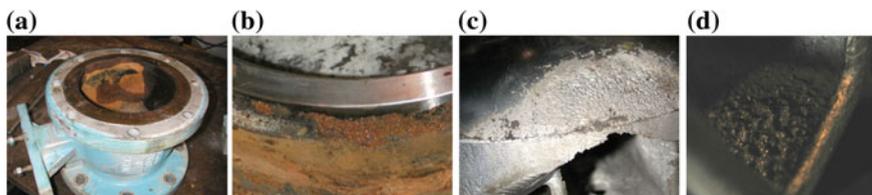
a General view of failed control valve. b Severe erosion of carbon steel inner surface near the stainless steel bracket. c Erosion of inner part. d Morphology of eroded ball surface (magnification)
